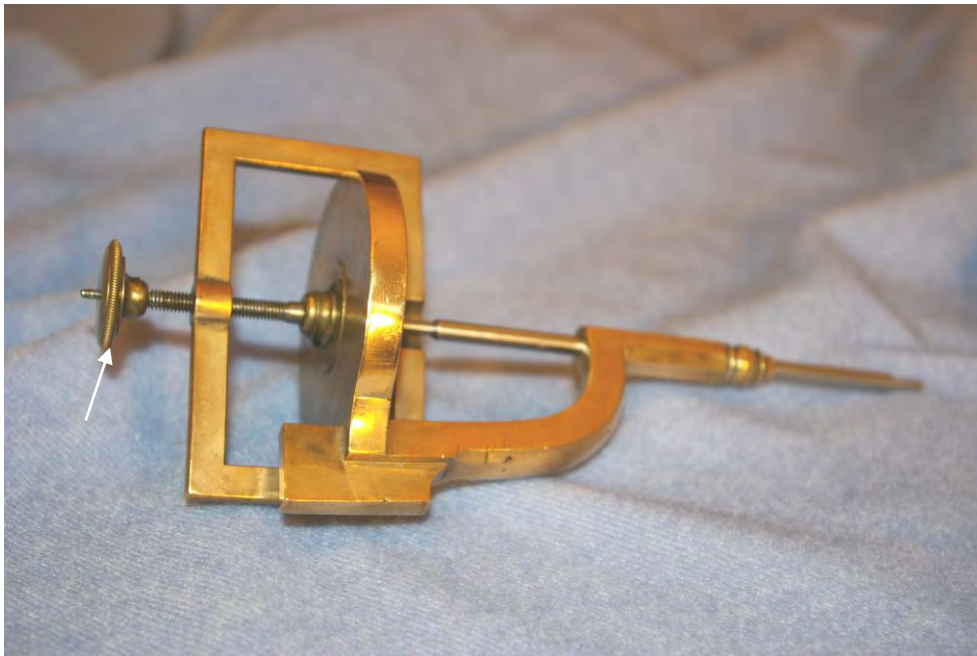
Uprighting tool with a screw jack for clamping, circa 1860.
